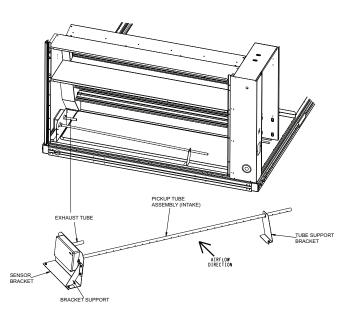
Horizontal Return Air Sampling Sensor Assembly and Tube Location (View reoriented to show opposite side for clarity.)
